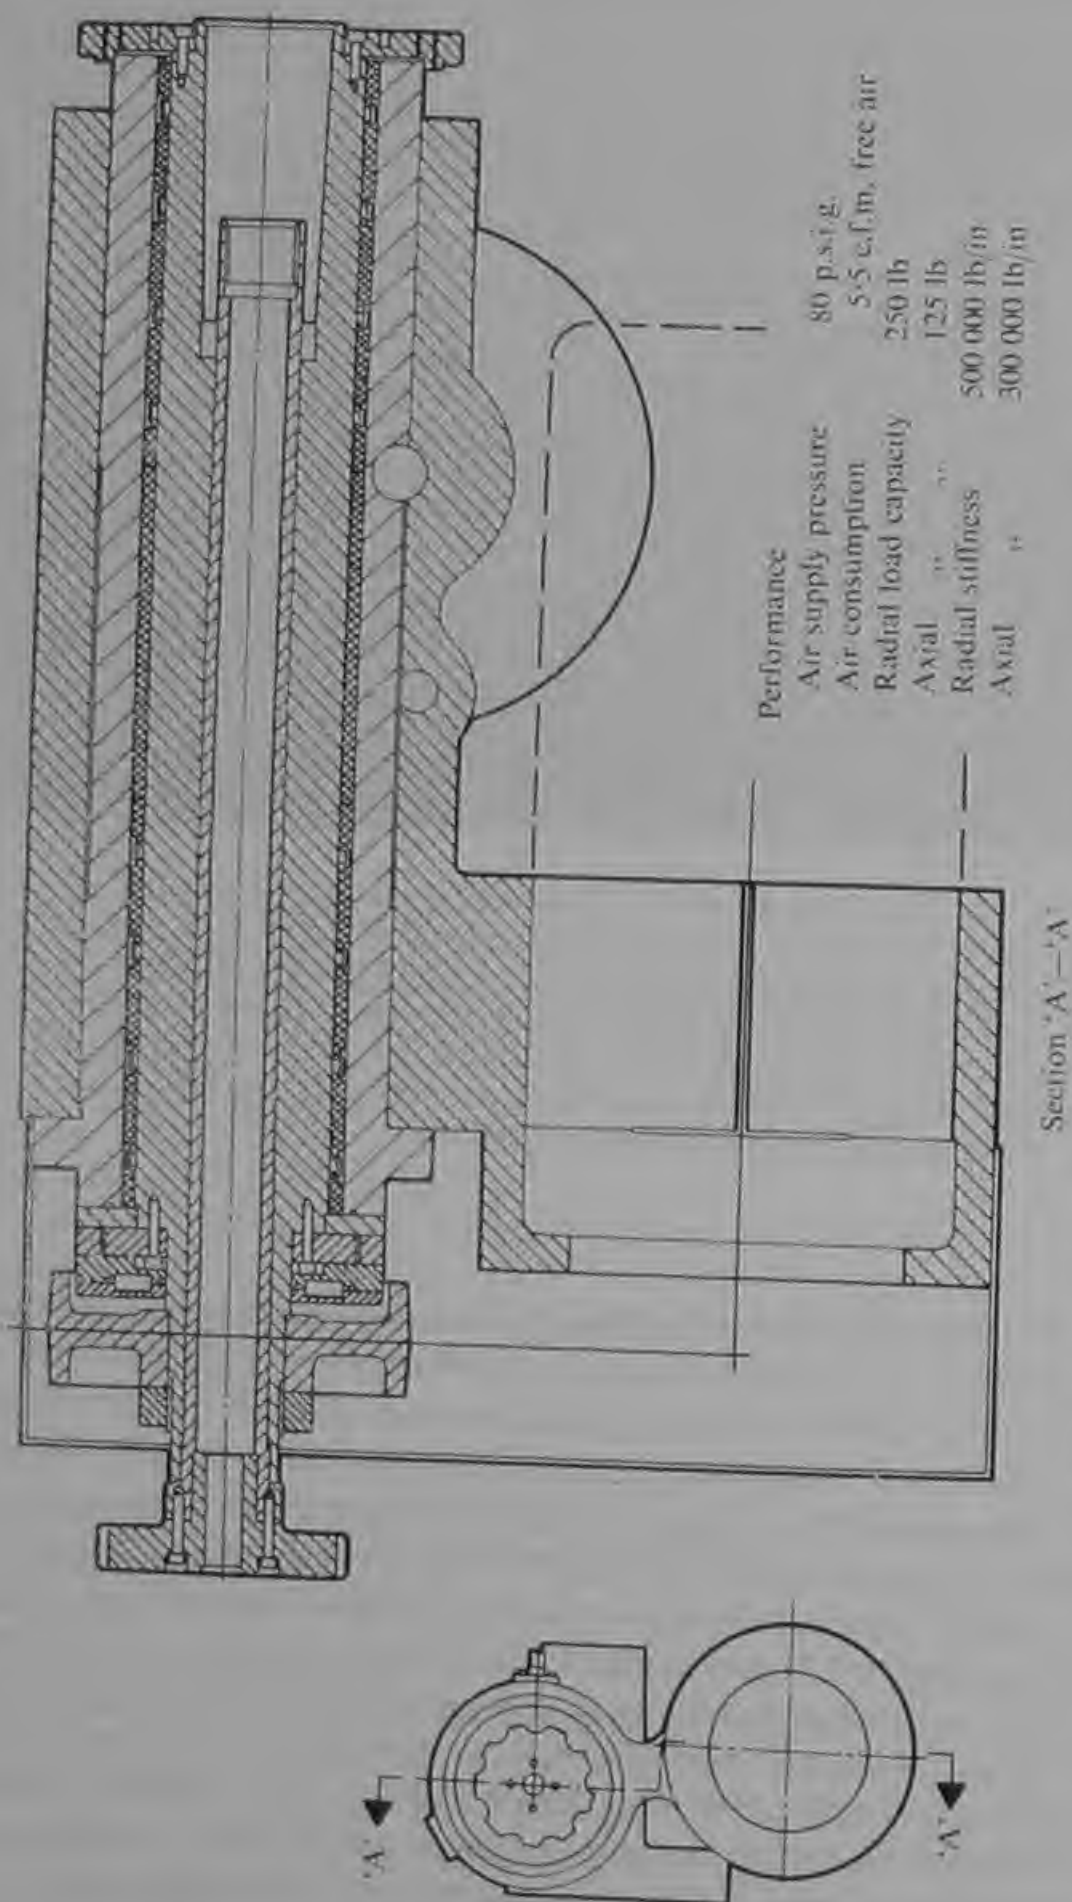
Aerostatic workhead for Studer 450 grinding machine
